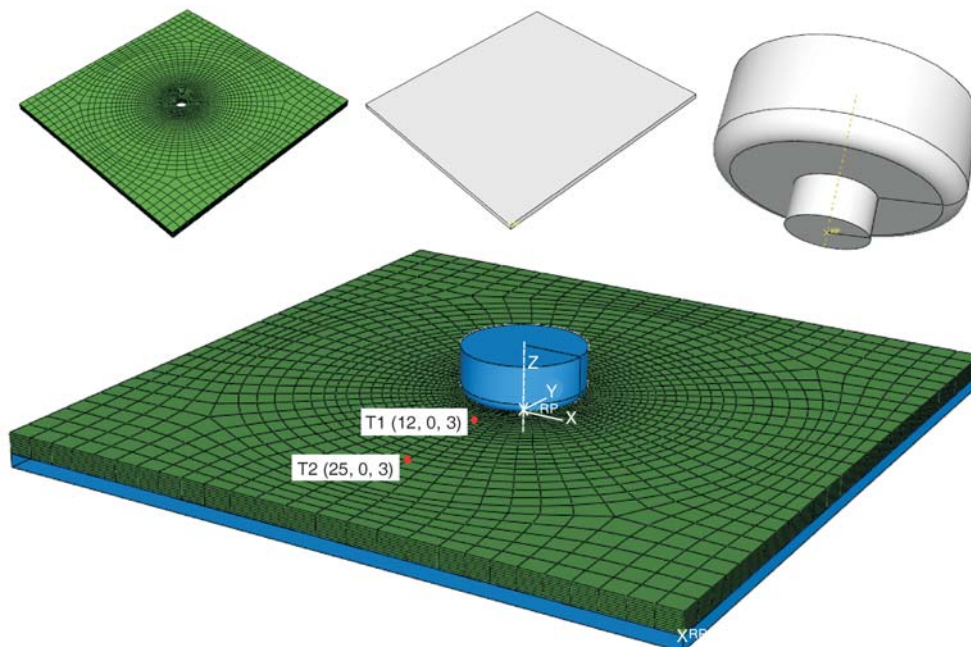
The numerical model of welding plate, tool and backing plate
